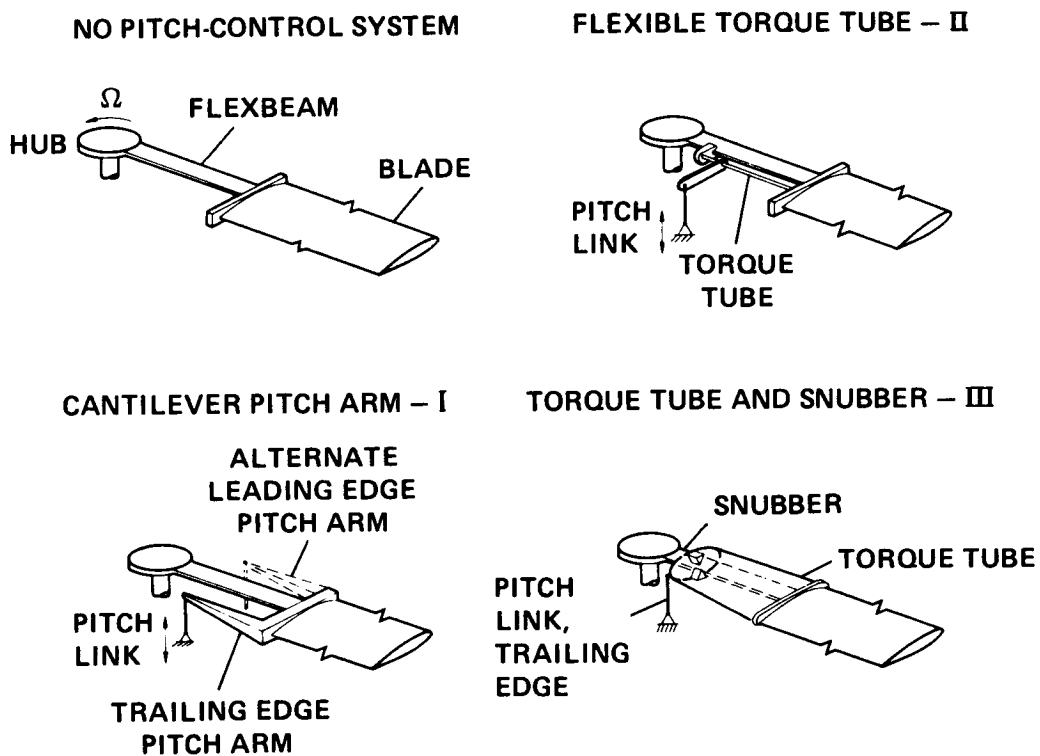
Principal configurations for bearingless rotor blade pitch-control systems.
